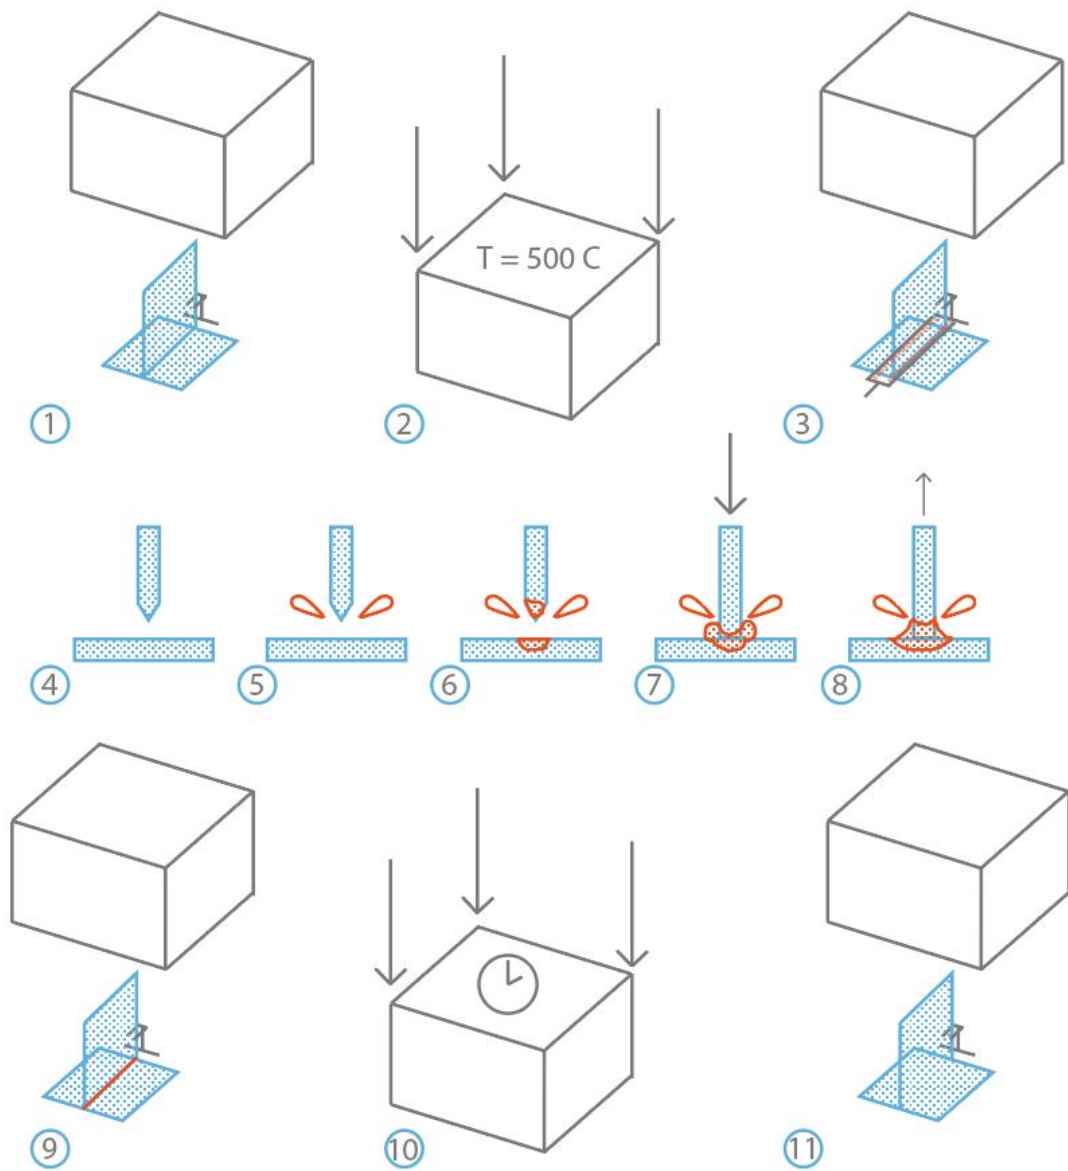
Welding process for the T-shaped system. Explanation provided in section 16
